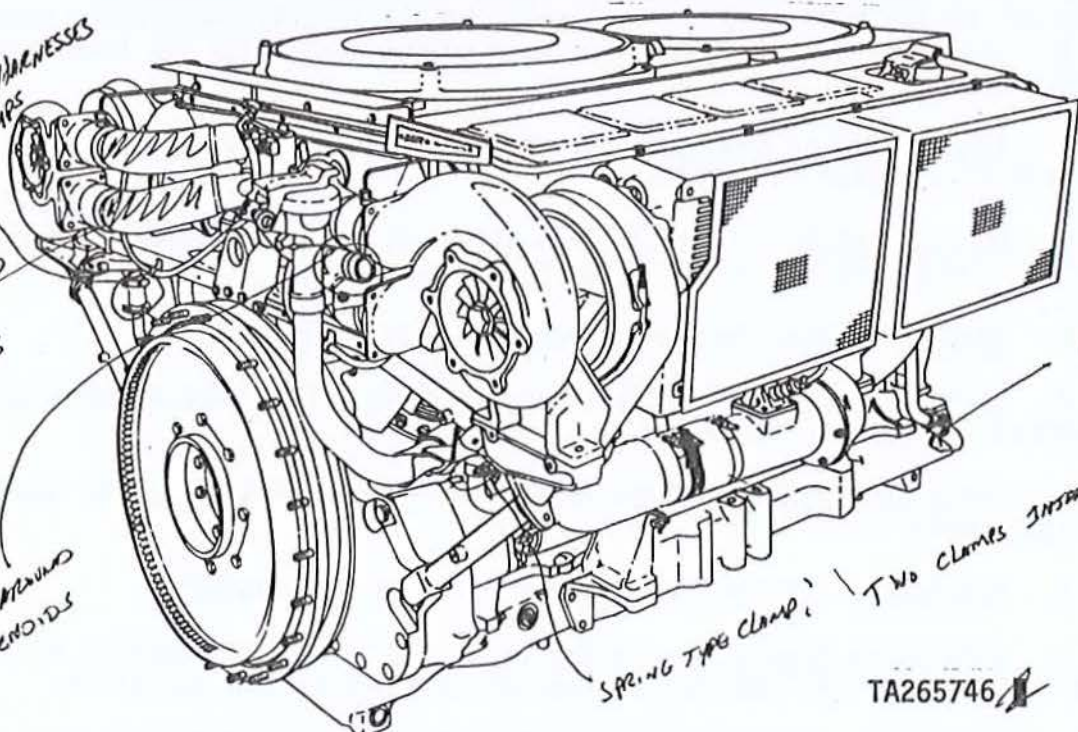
Model AVDS-1790-2DR engine, left rear view.
